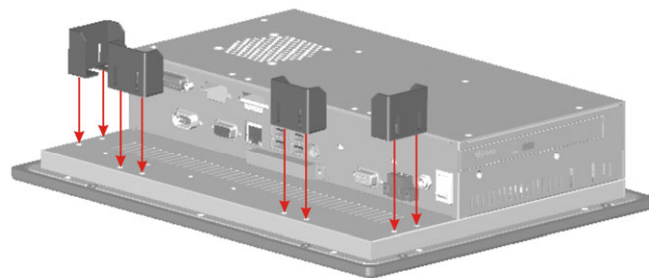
Tighten the Panel Mounting Clamp Screws
